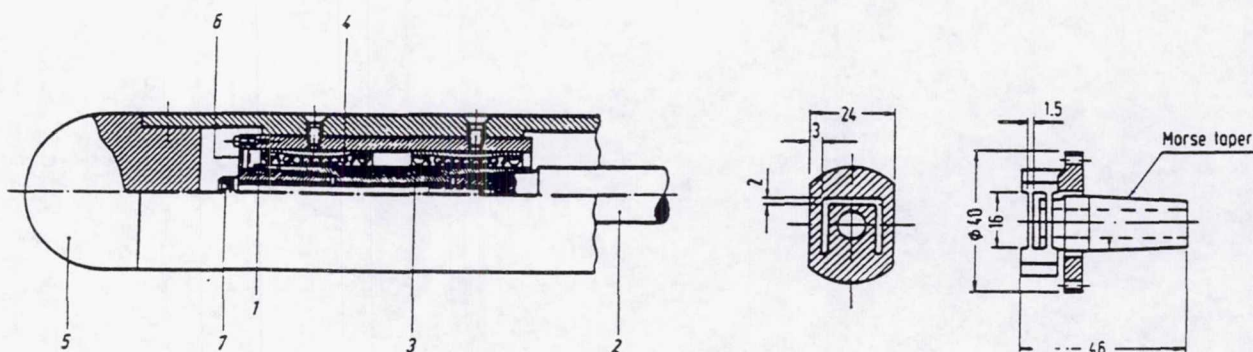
Non-integral axial-force element: 1 load cell, 2 balance, 3 Thomson shaft, 4 ball bushing, 5 Morse taper, 6 flexure plate and strain gages, 7 clamping screw.
